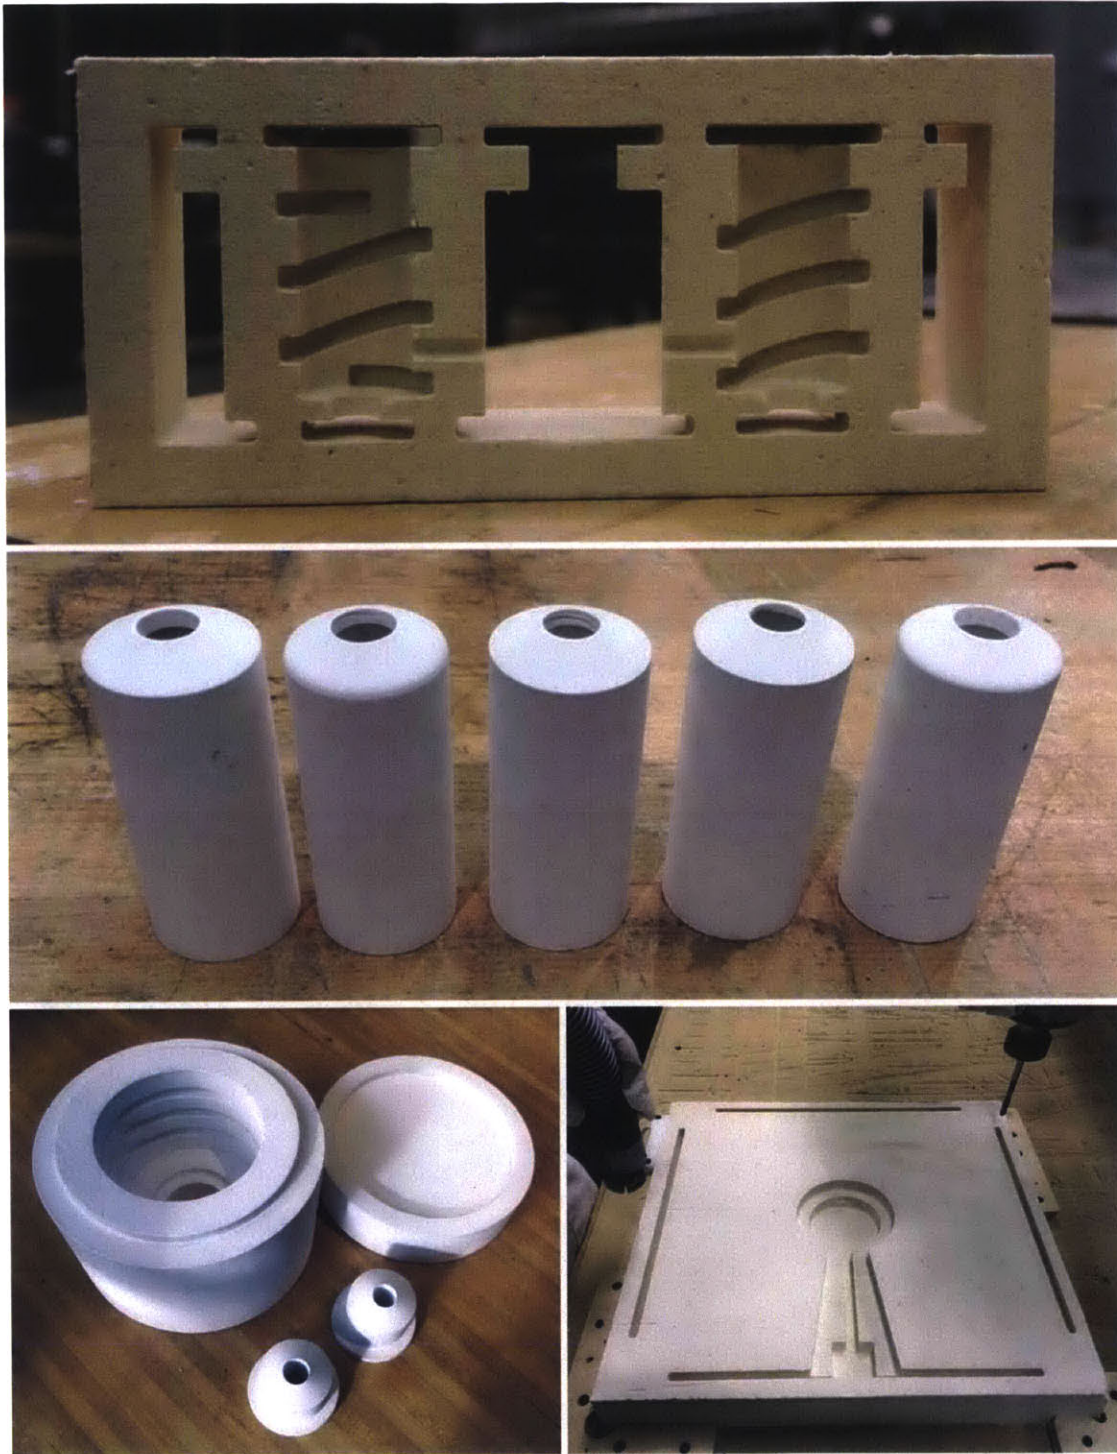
(A-bottom) The Crucible Kiln and Nozzle Kiln fabricated from alumina-silica fiber board (B-middle) Nozzles machined out of high temperature alumina bisque ceramic rods (C-top) Nozzle Kilns clam-shell fabrication strategy
